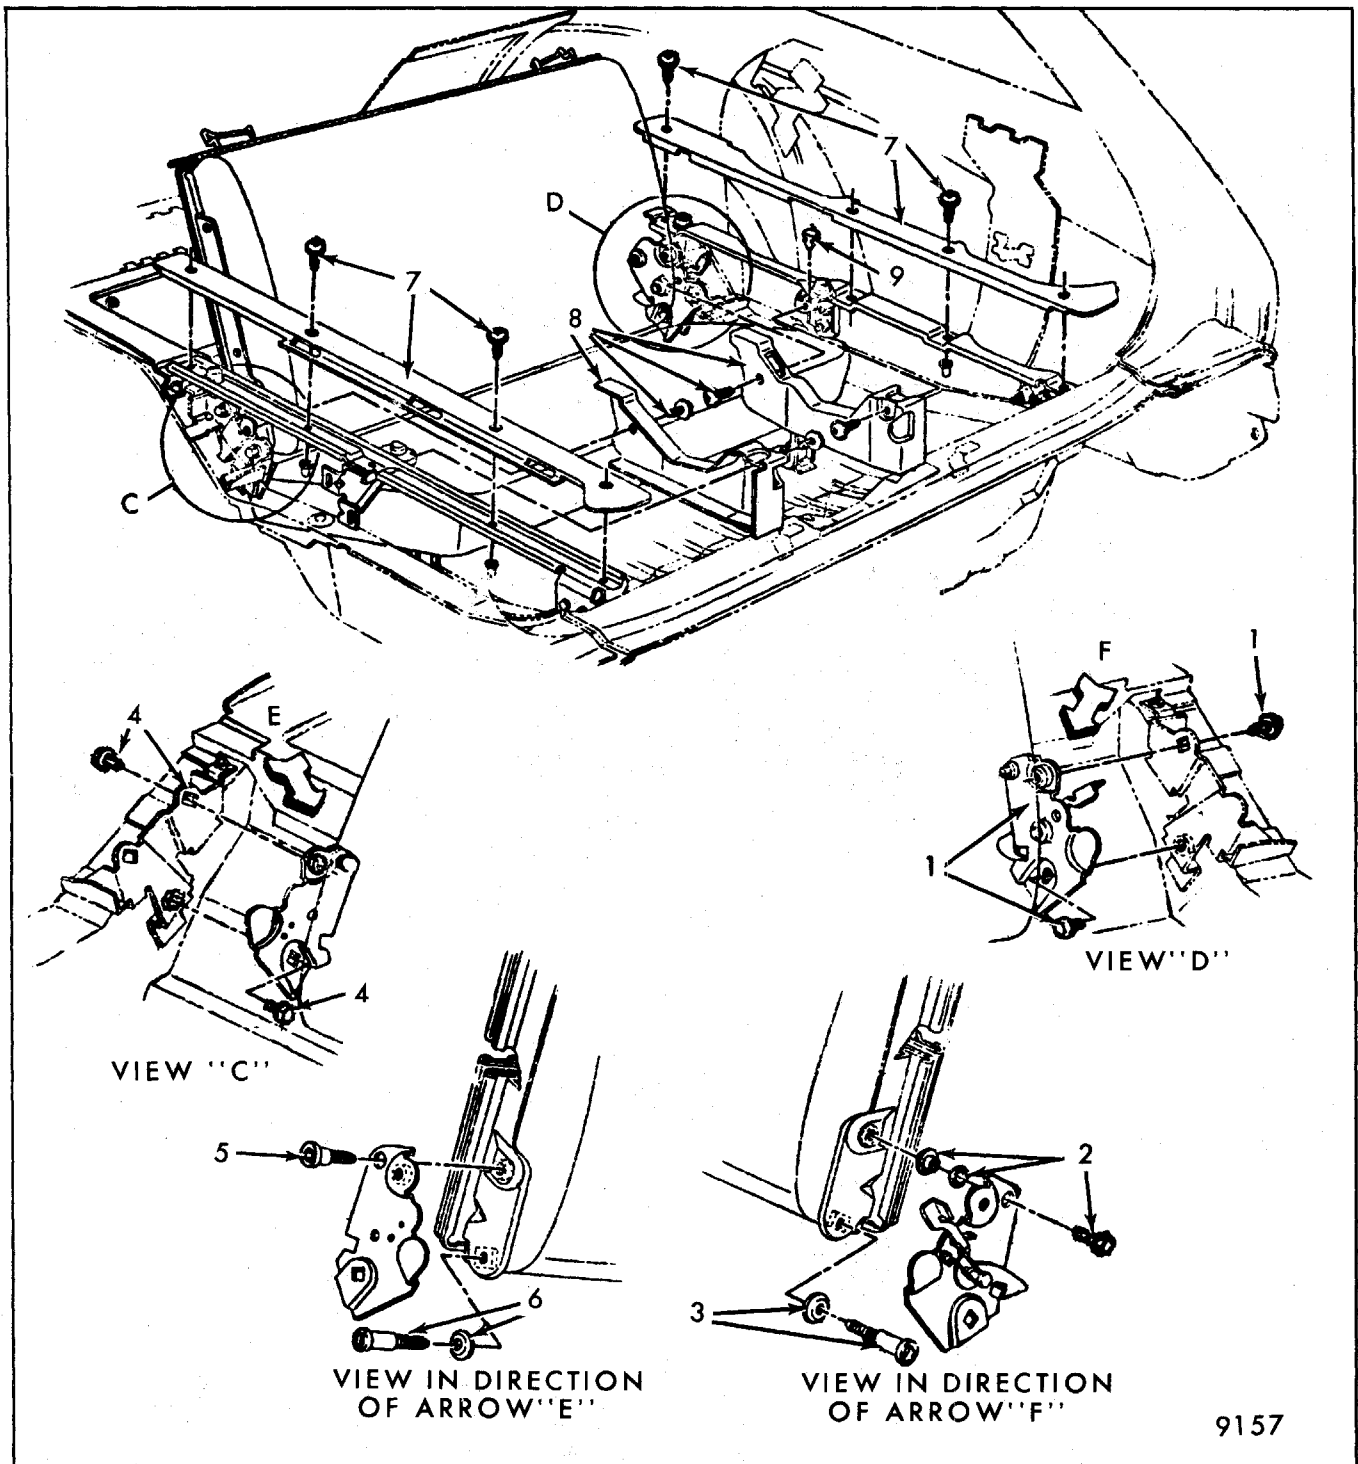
Folding Third Seat Back and Lock Installation - "A" Body Three-Seat Styles
